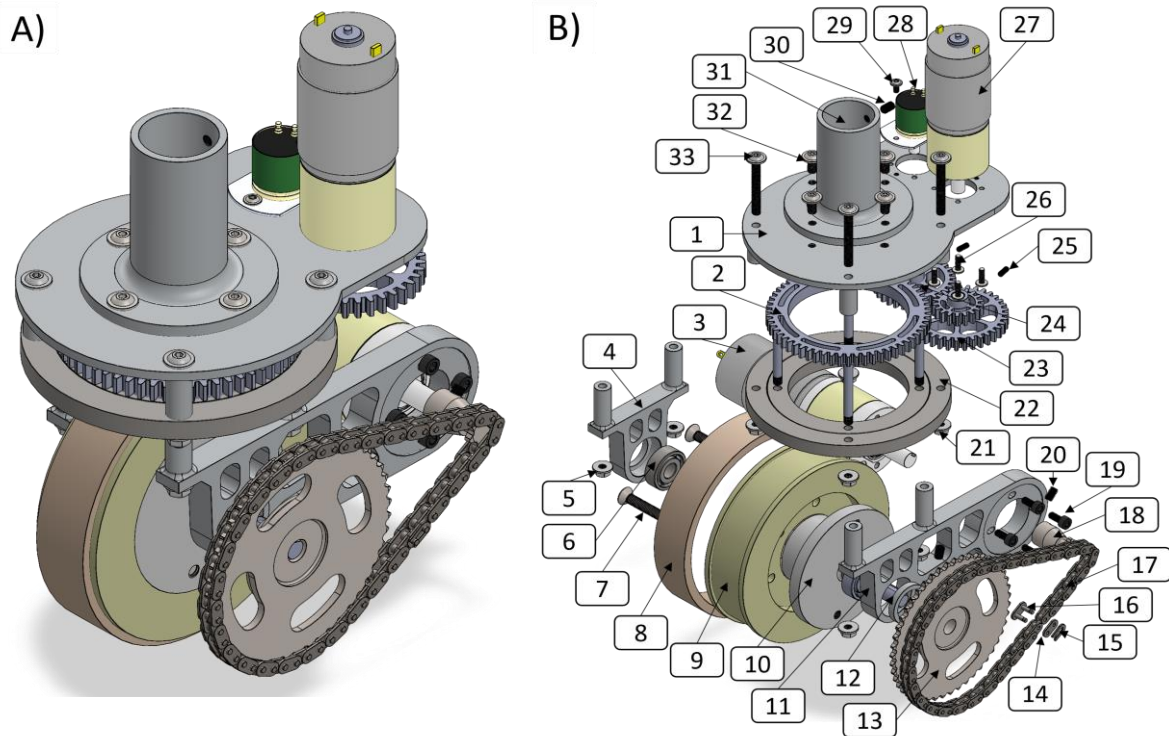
(a) Improved design of swerve drive module (b) exploded view of an improved design
